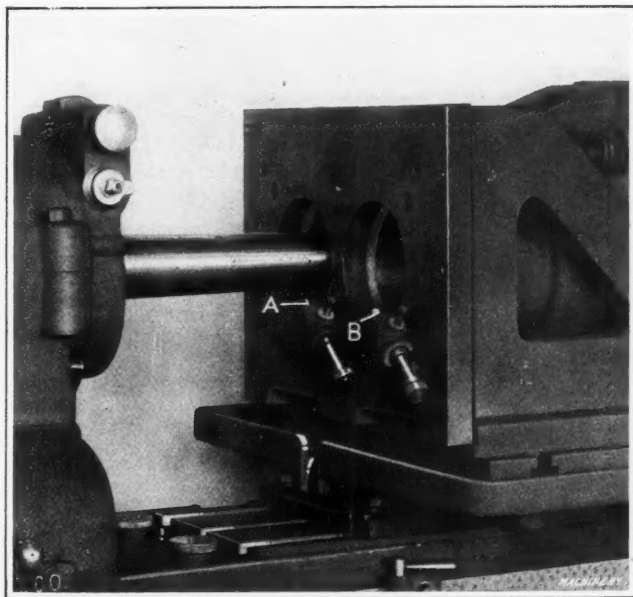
Devices for truing Grinding Wheel on Heald Cylinder Grinding Machine
